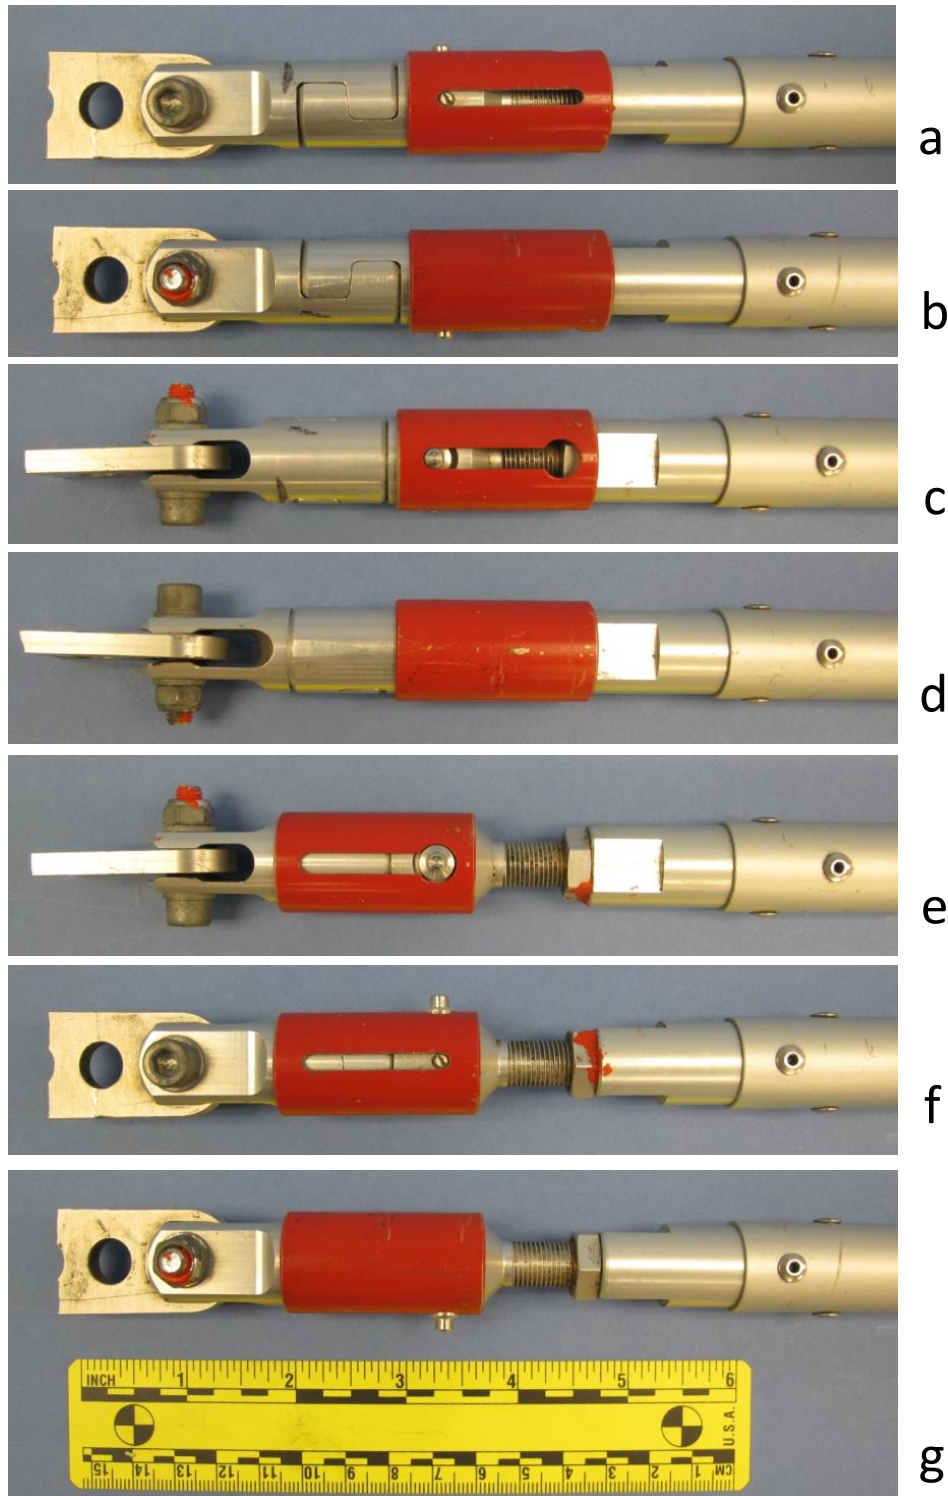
Multiple views of the elevator quick fastener assembly. Views (a-d) show images of the quick fastener assembly with the sleeve lock open. Views (e-g) show images of the quick fastener assembly with the sleeve lock fully closed and lock button extended.
